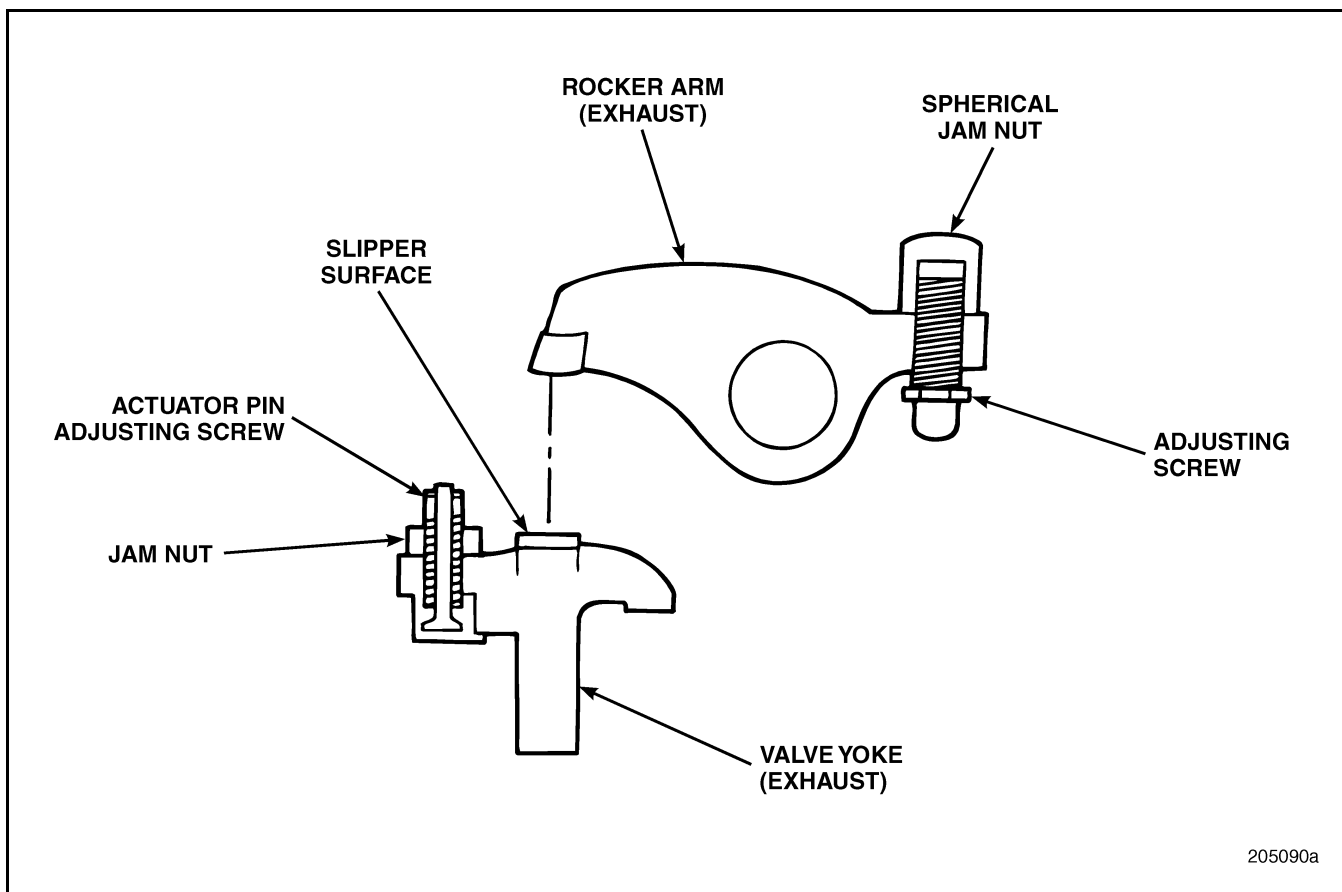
J-Tech™ Exhaust Valve Rocker Arm and Yoke
